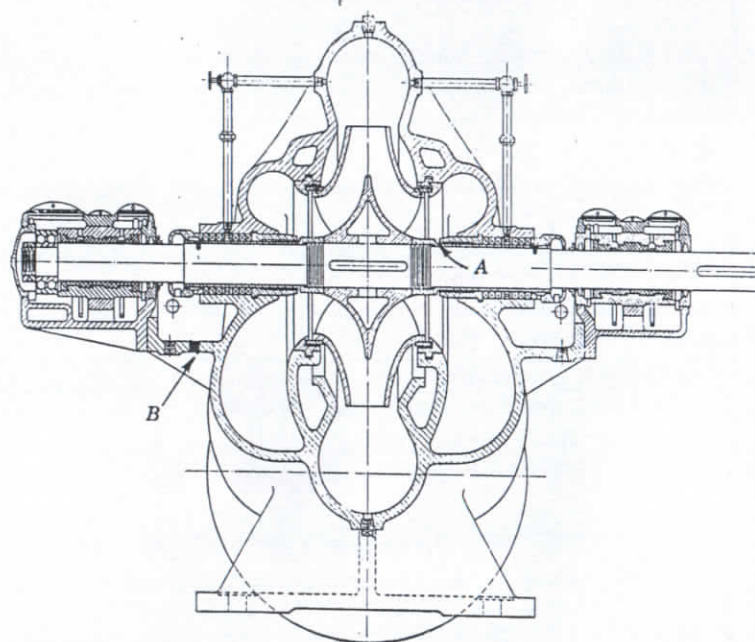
Broken bearing bracket resulted from wrong rotation.
